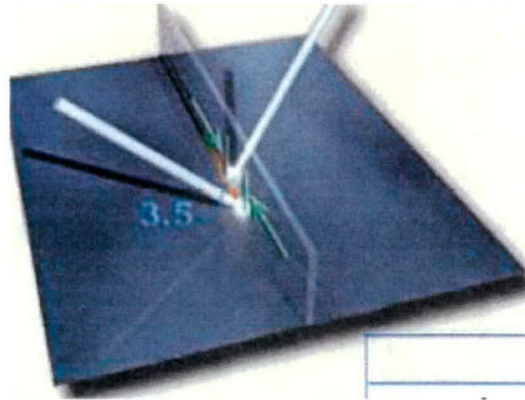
The twin-welding torch arrangement used in making the two fillet welds on the T-joint. The welding torch on the left side follows the right side torch by 3.5 in.
